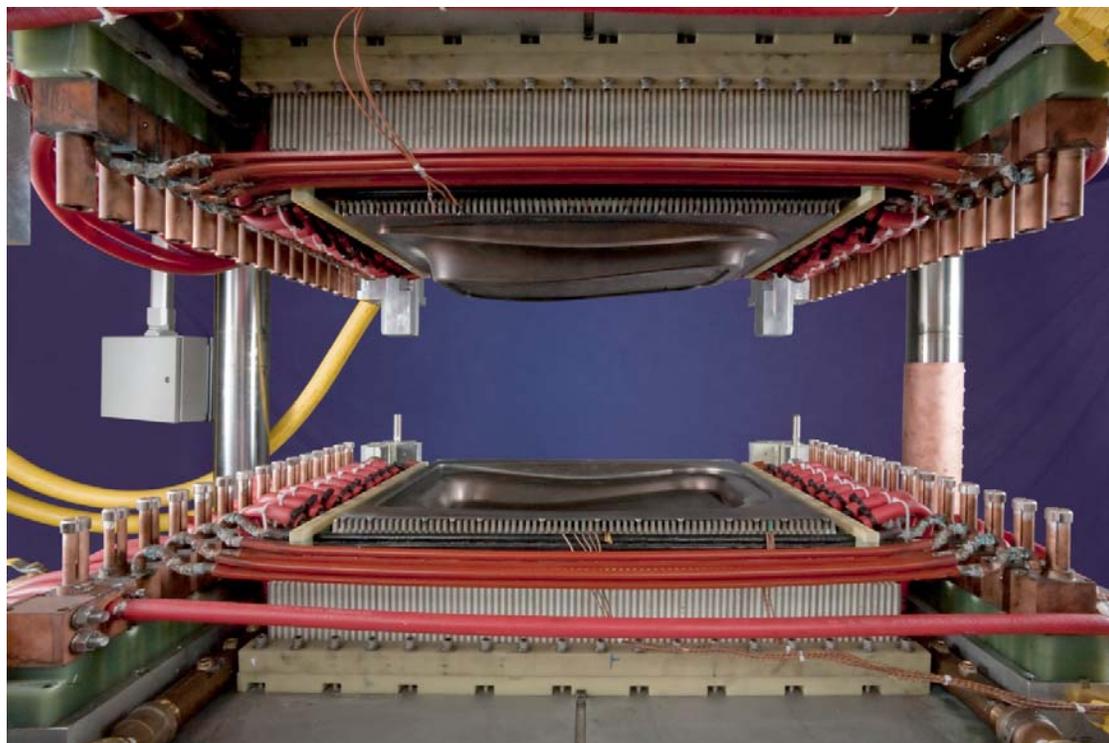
Front view of the completed Boeing seatback tool installed in the induction press and ready for molding
